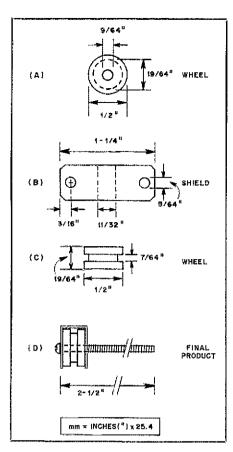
This diagram illustrates the steps in fabricating pulley wheels for use as quadantenna wire-to-spreader connectors.
